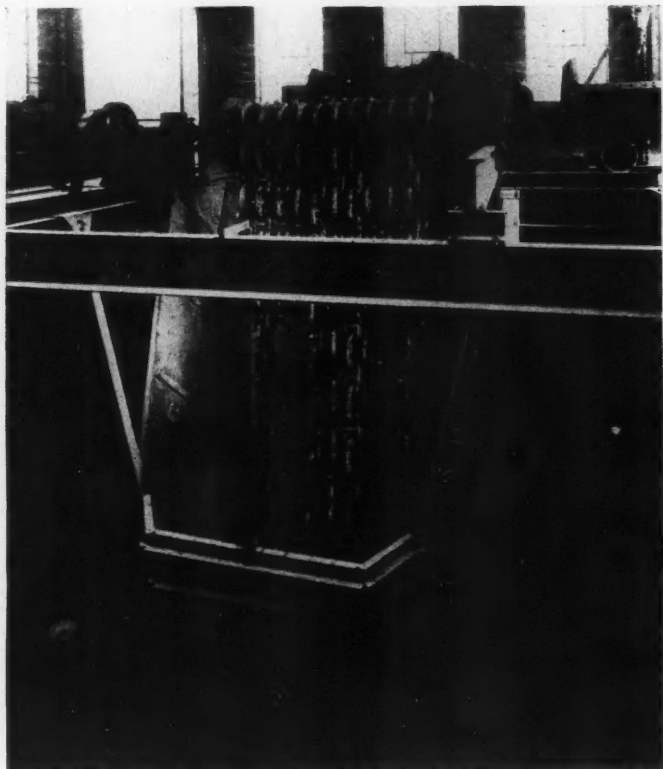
Ross Feeder on 72-in. by 48-in. Jaw Crusher.
